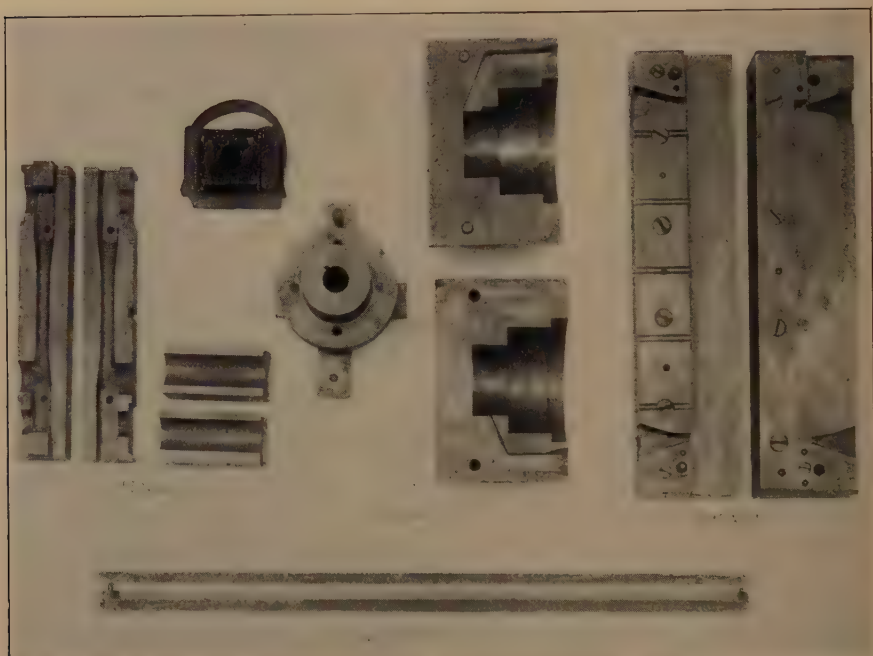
MOLDS FOR PHYSICAL TEST SPECIMENS OF SOLDER.
